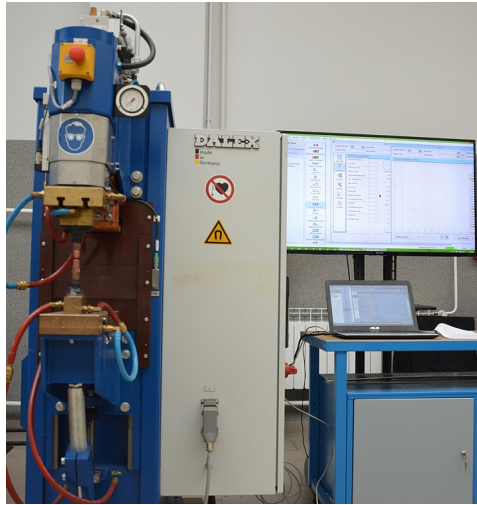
Welding stand equipped with the PMS 14-6MF inverter welding machine and the XPegasus system
